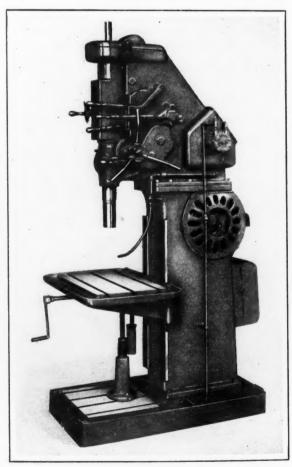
Drilling and Tapping Machine Brought out by the Barnes Drill Co.
